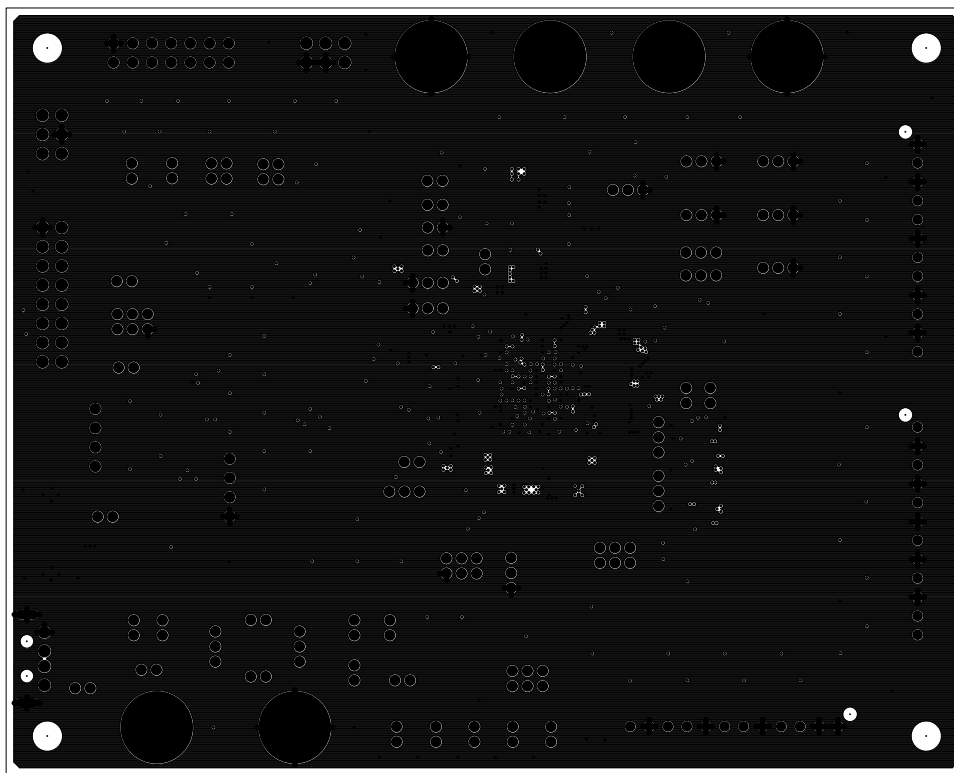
KIT34708VMEVBE (Rev. B) Inner 1 layer Layout
